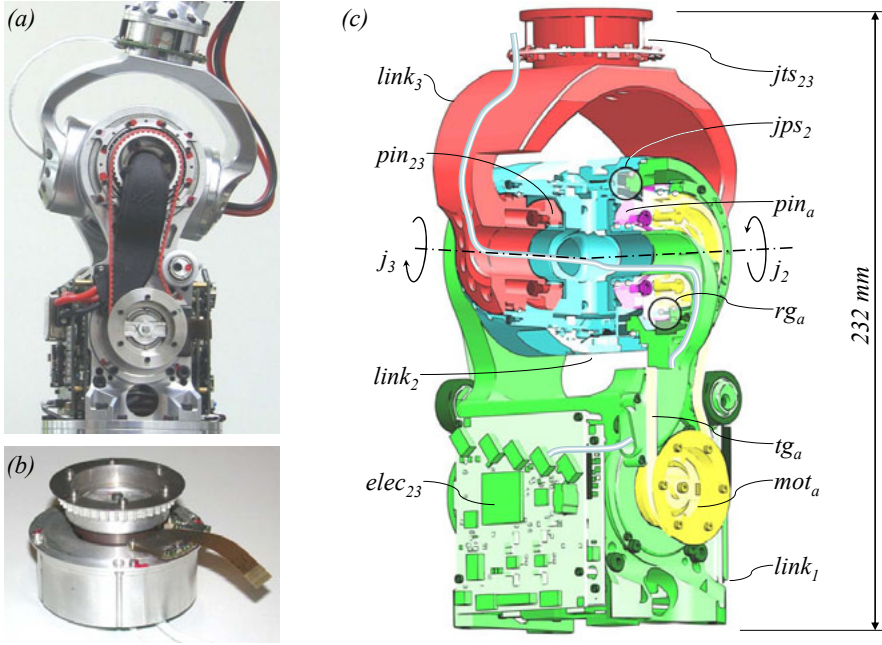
The *miro*₂₃ joint module (a), motor module (mot), integrating motor, motor position sensor, brake, and timing belt gear (b), rendered view (differential gear portion as cross-section) with stationary parts (*link*₁) highlighted in green, parts coupled with *link*₂ in blue, joint-sided parts (*link*₃) in red, high-speed motor parts are shown in yellow (c)
